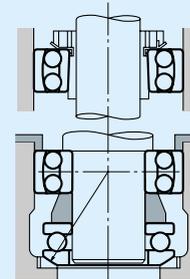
Bearing Mounting Arrangements and Bearing Types
